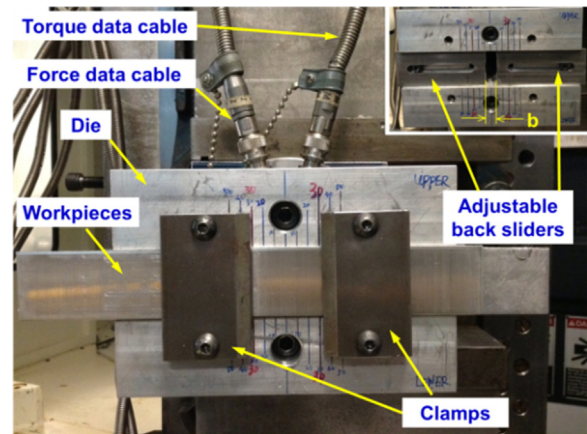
Fixture used in the riveting tests with data acquisition for force and torque.
